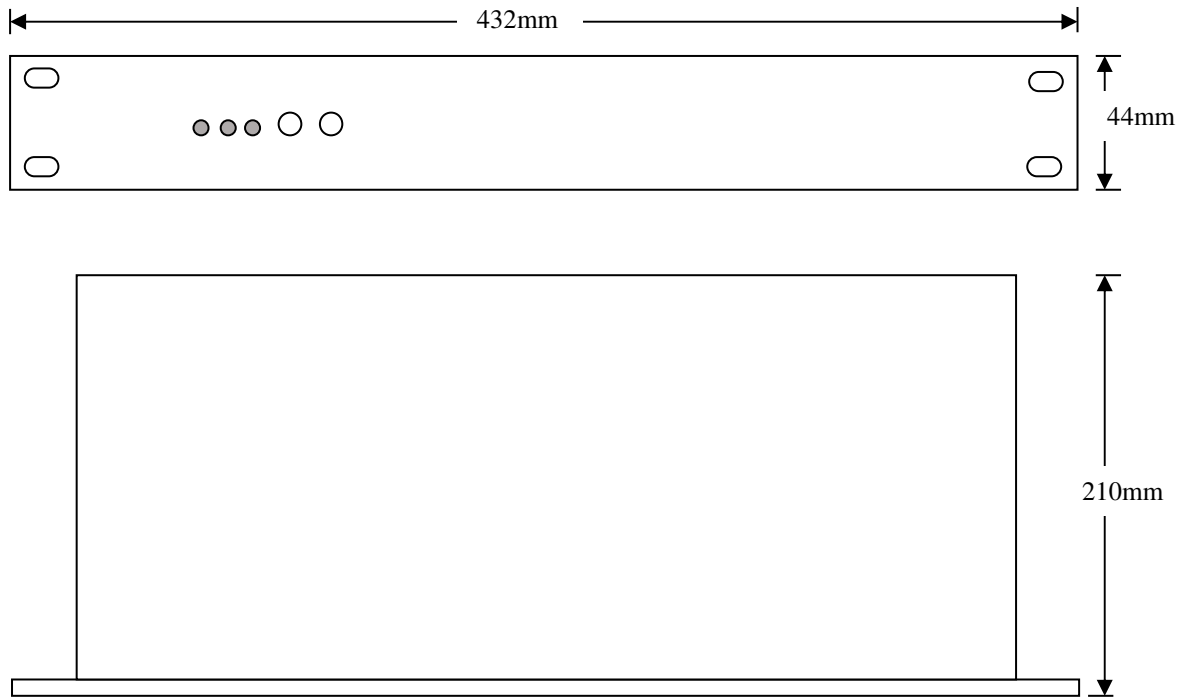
OSD480 MOUNTING DIMENSIONS
